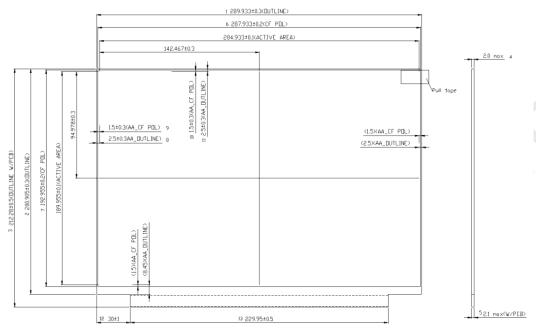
TFT-LCD Module Outline Dimension (Front View)
